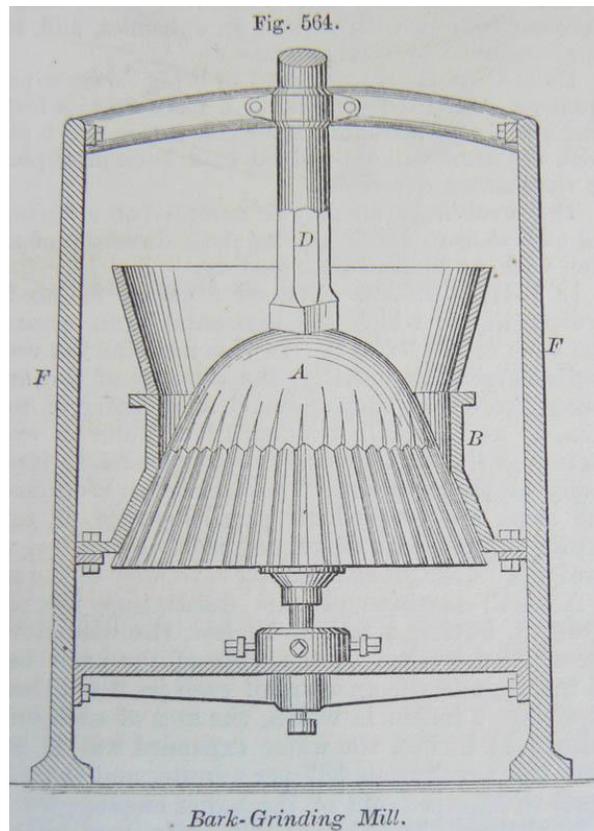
Bark Grinding Mill from *Knights American Mechanical Dictionary*, 1873.
